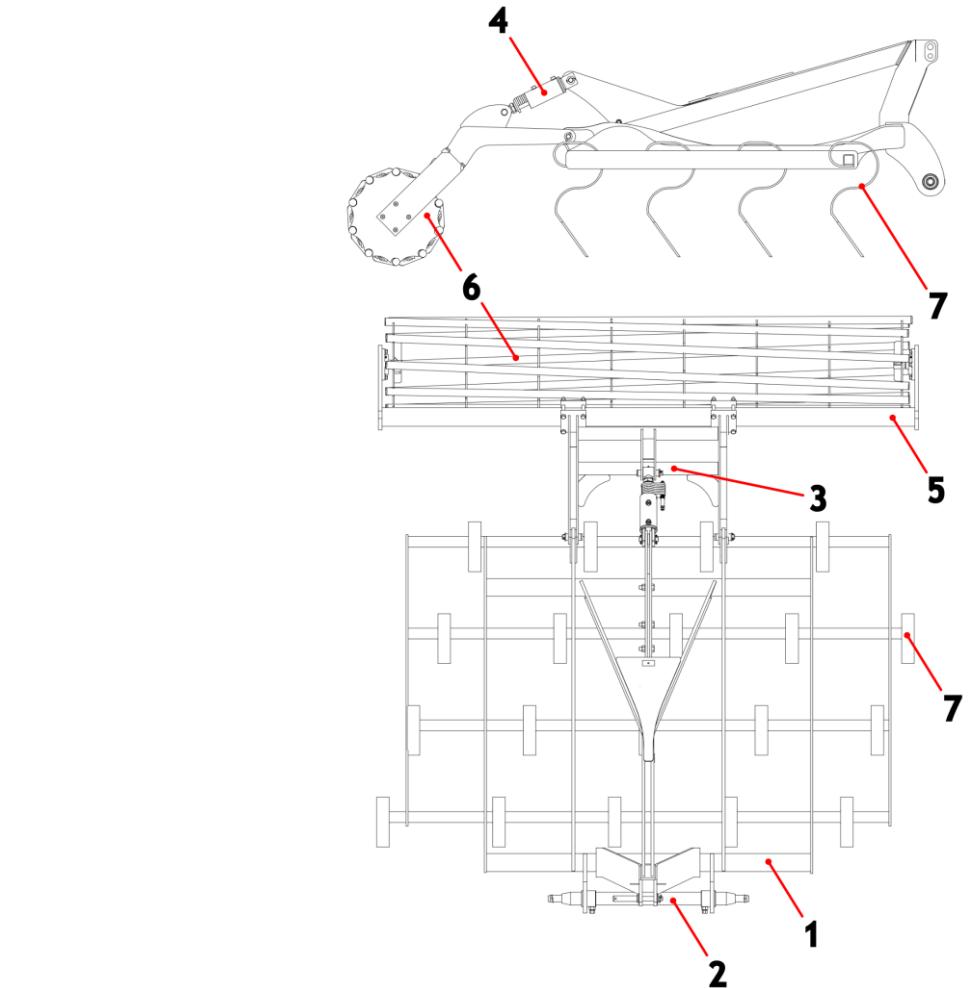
Construction of the cultivator SUPER in non-folding option with tubular roller option (1 - frame, 2 - drawbar, 3 - arms, 4 - hydraulic roller lifting unit, 5 - roller frame, 6 - tubular roller (option), 7 - spring tine)
